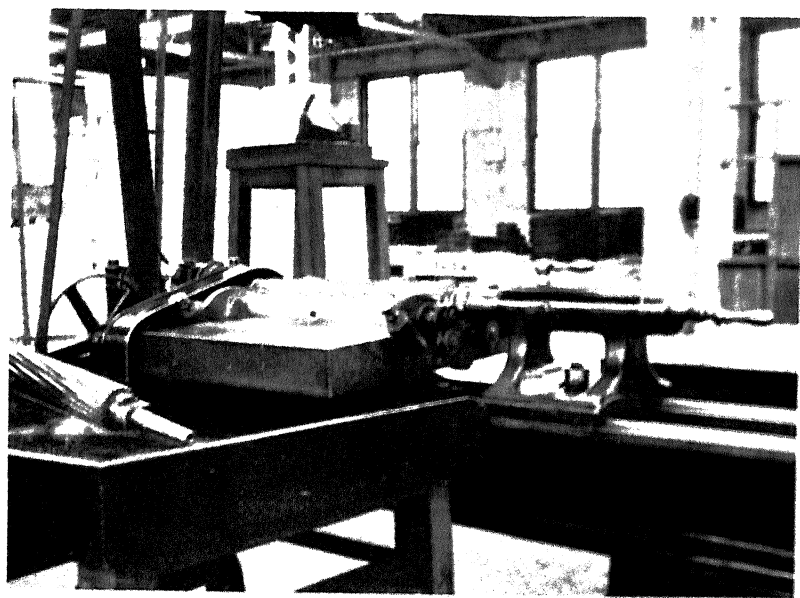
Machine for Milling Micamite, with Section Flaps and Holes, and a permit of more clearly seeing the Cutter and the Feed Reversal.
